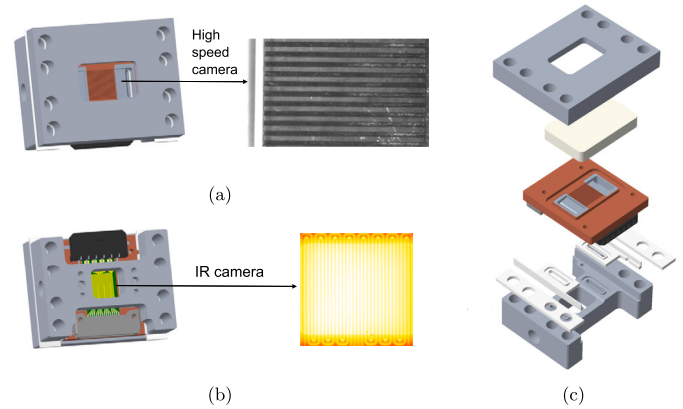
Top view (a), bottom view (b) and exploded view (c) of the multi-microchannels.
